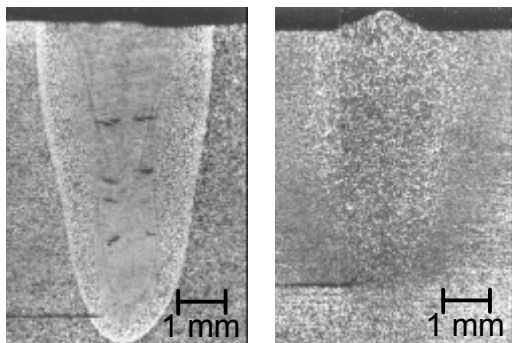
Crack free welding of high carbon containing steel using HWT laser / induction /15/:
